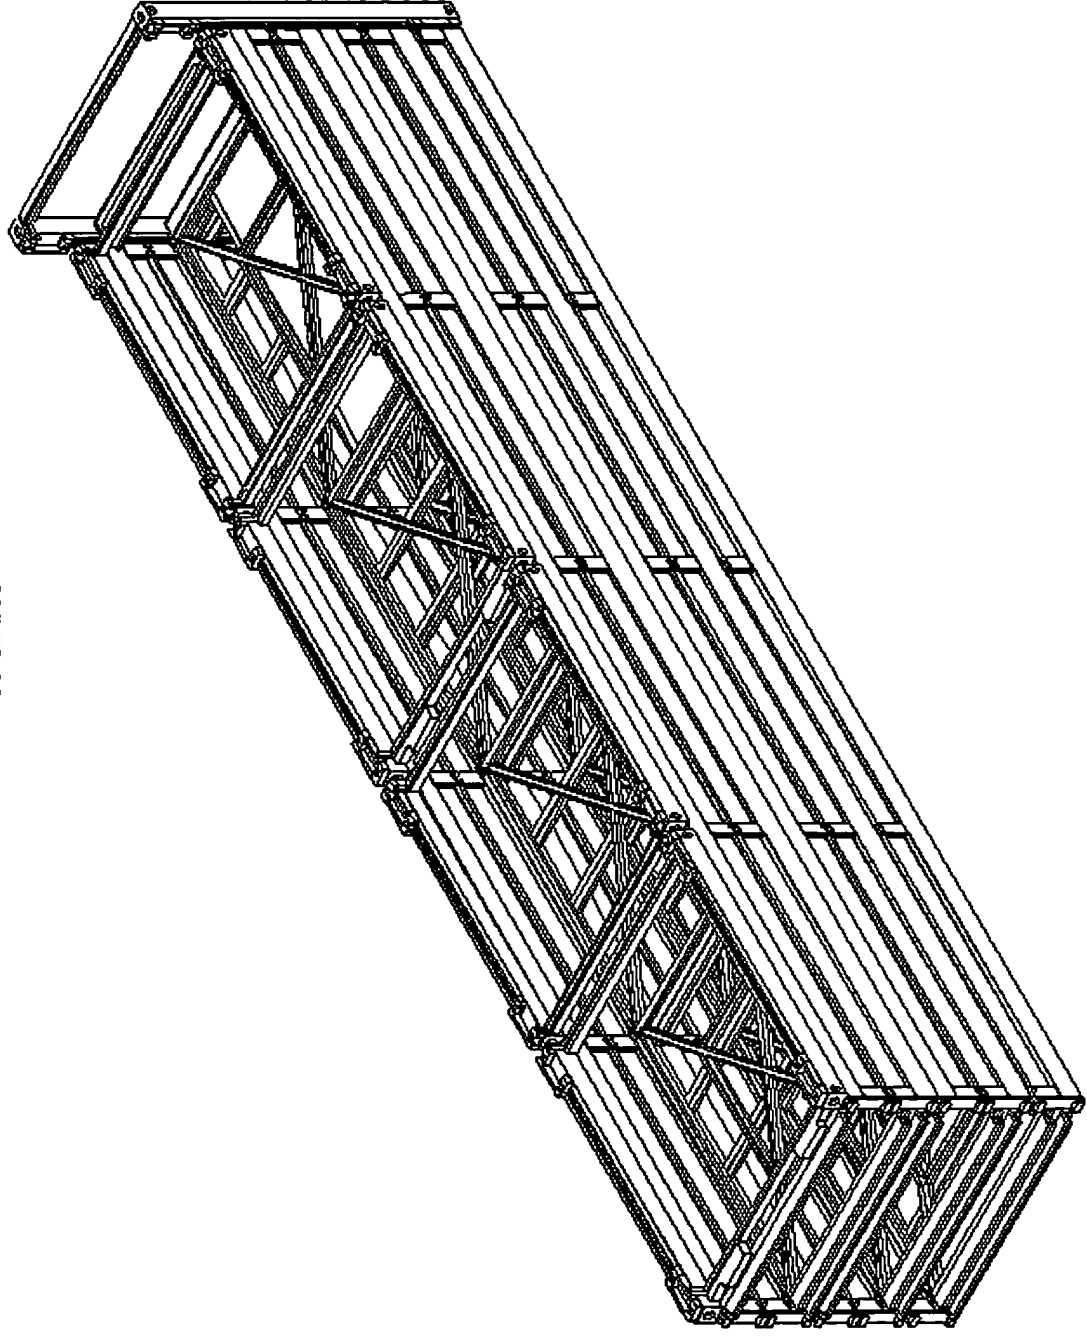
B: Step5 of disassemble and load process: The left frame of the shipping collapsible cargo container is assembled.
